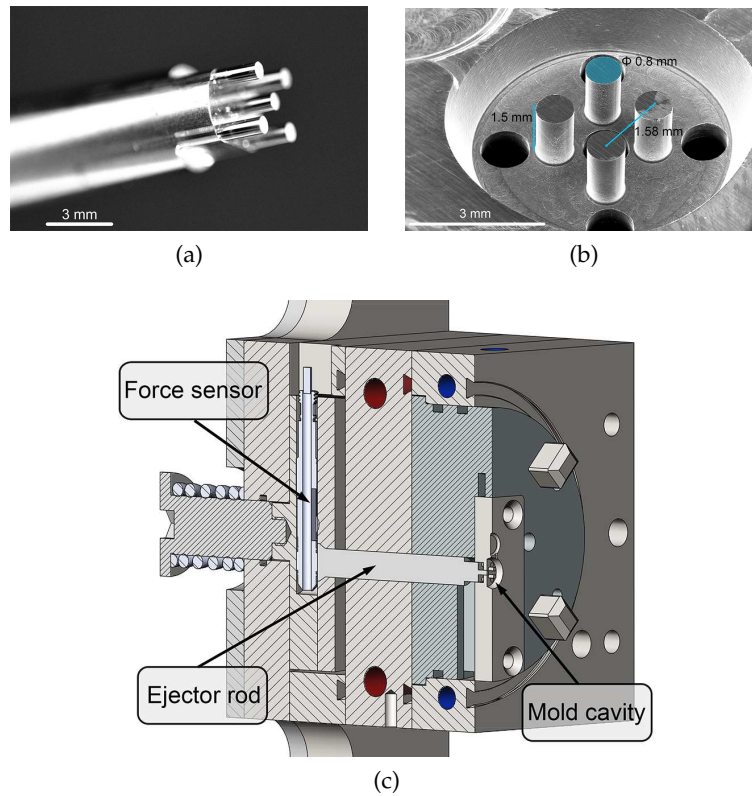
Design of mold insert and assembly - *MOLD A* [69].
